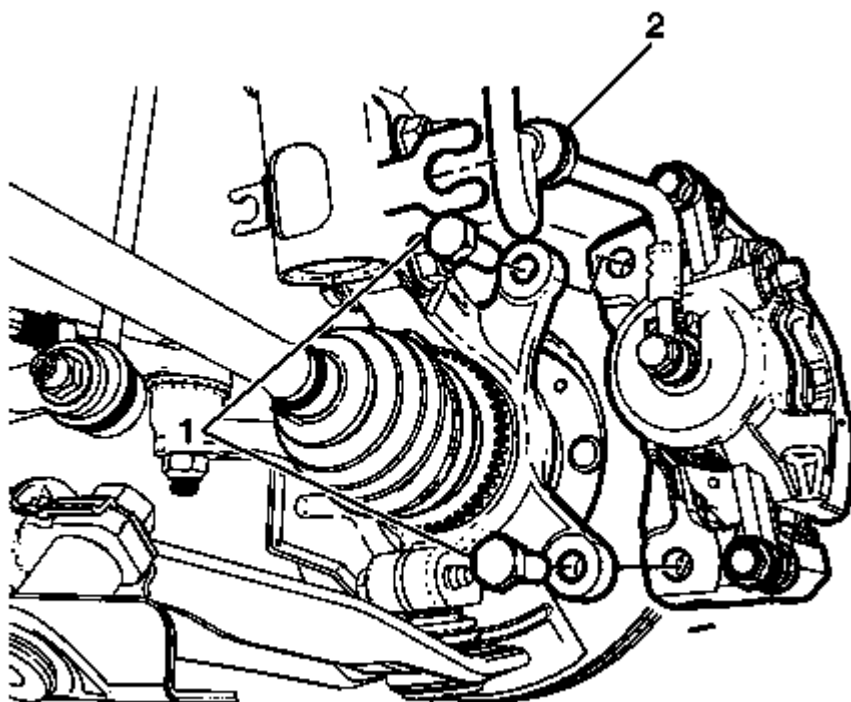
Front Brake Hose And Front Brake Caliper Retaining Bolts
